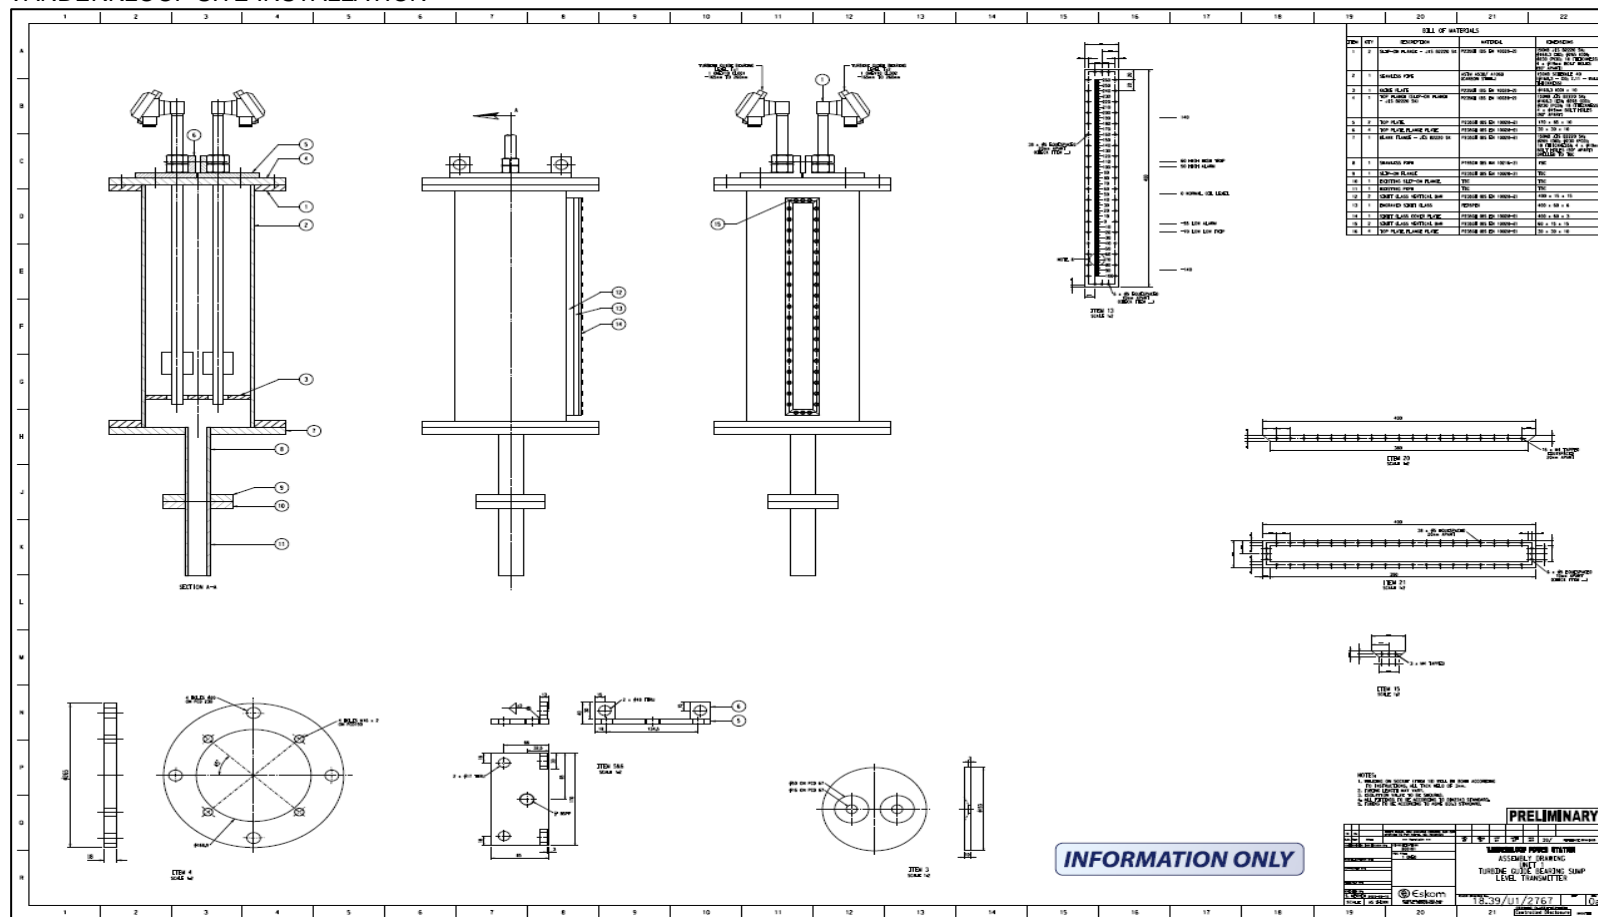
Assembly Drawing Level Transmitter Chamber for Oil Sump
